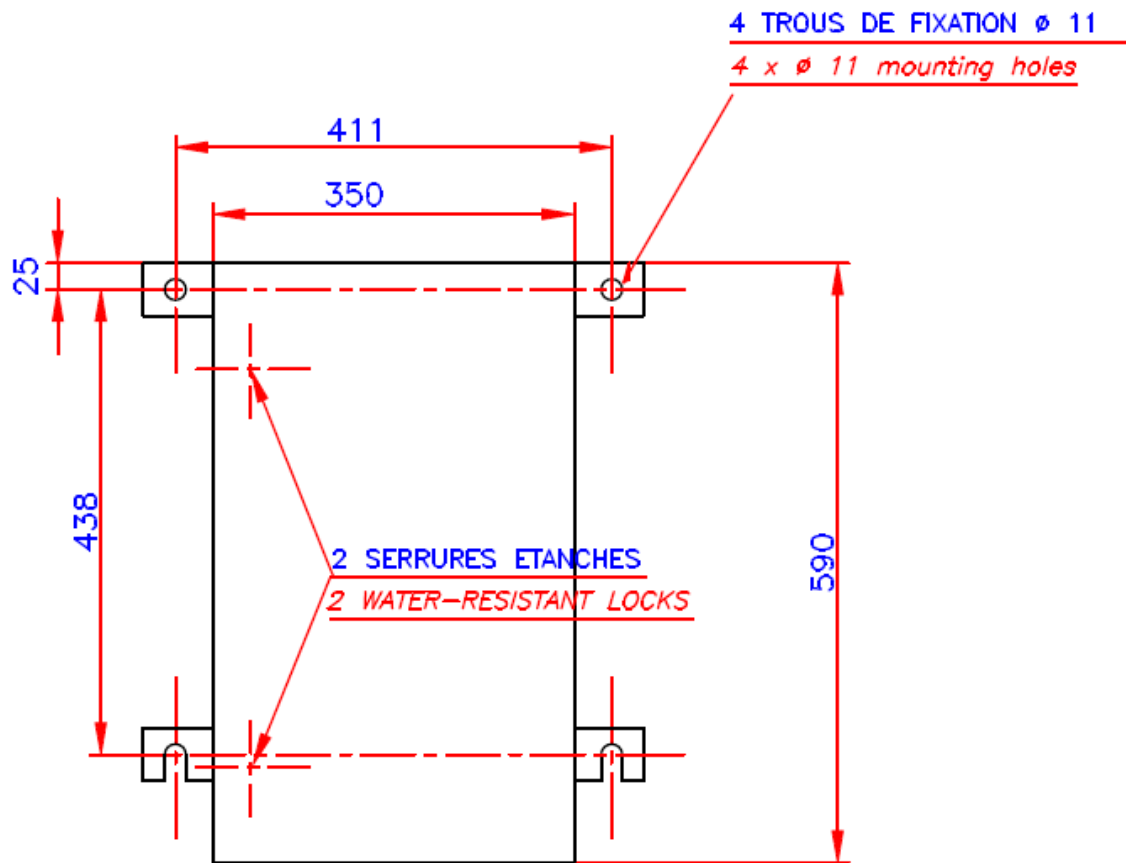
OUTLINE AND MOUNTING DIMENSIONS OBSTAFLASH HI POWER SUPPLY.
